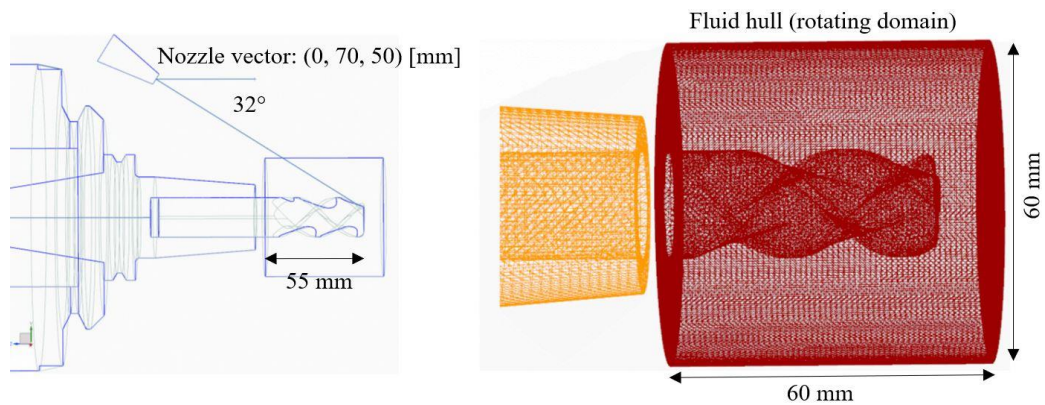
Left: coolant nozzle positioning; Right: CFD model surrounding the tool
